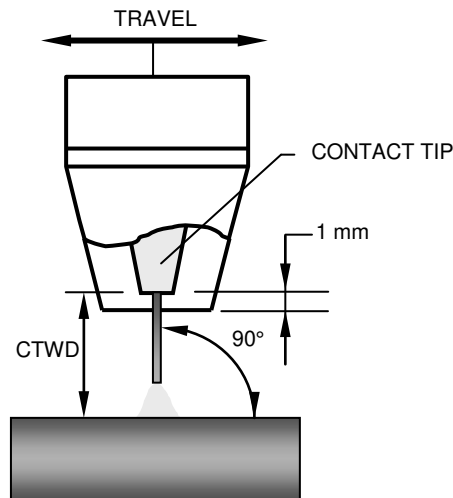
A diagram showing the contact tip position relative to the shielding nozzle used during welding. [not to scale]
